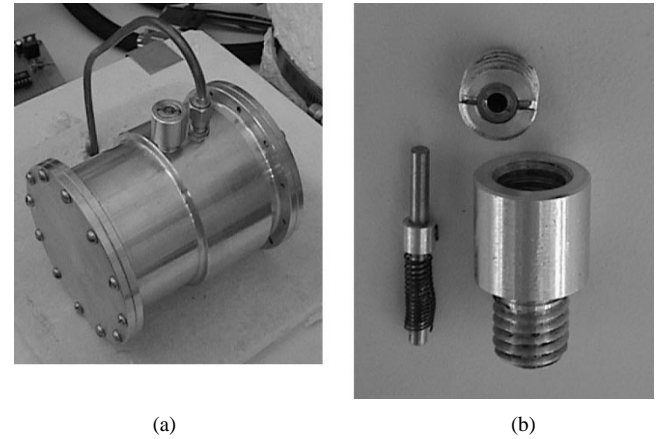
(a) Cavity with SMA actuator and RF probe attached. (b) Assembly view of the SMA actuator.
